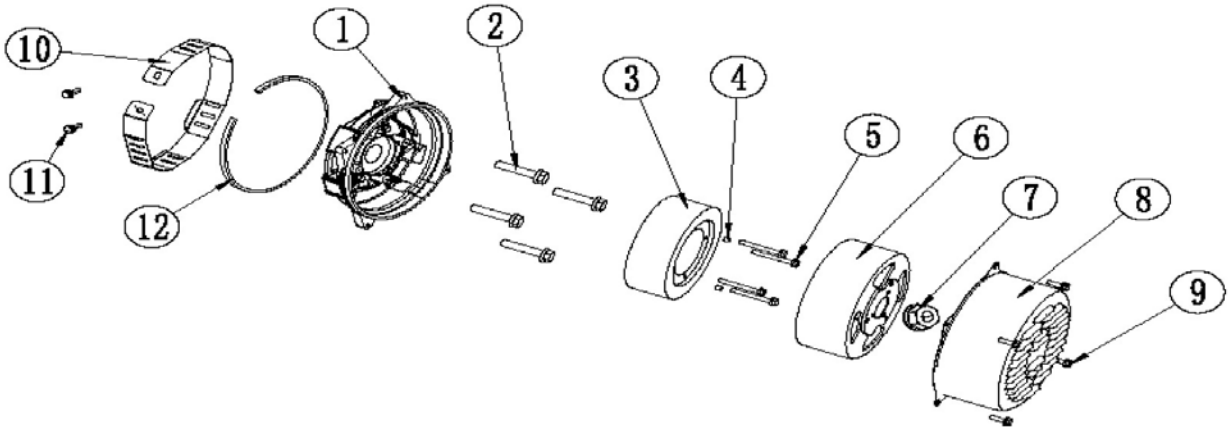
Spare parts drawing 5 PG-I 42 SE
